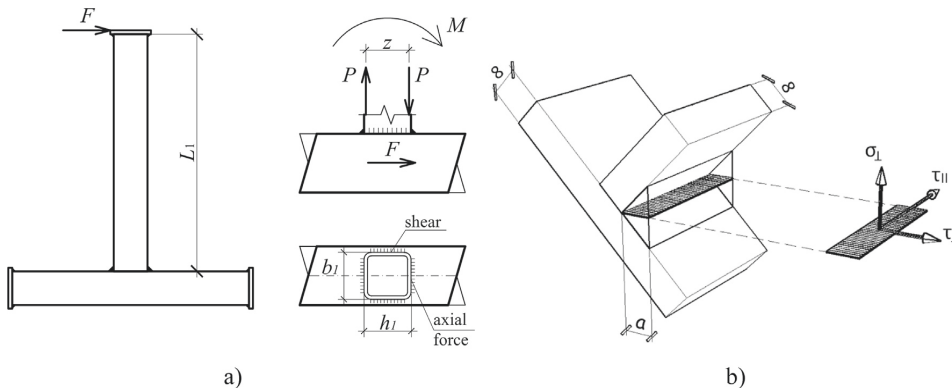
Design of welds: (a) load components; (b) stress components in weld.
